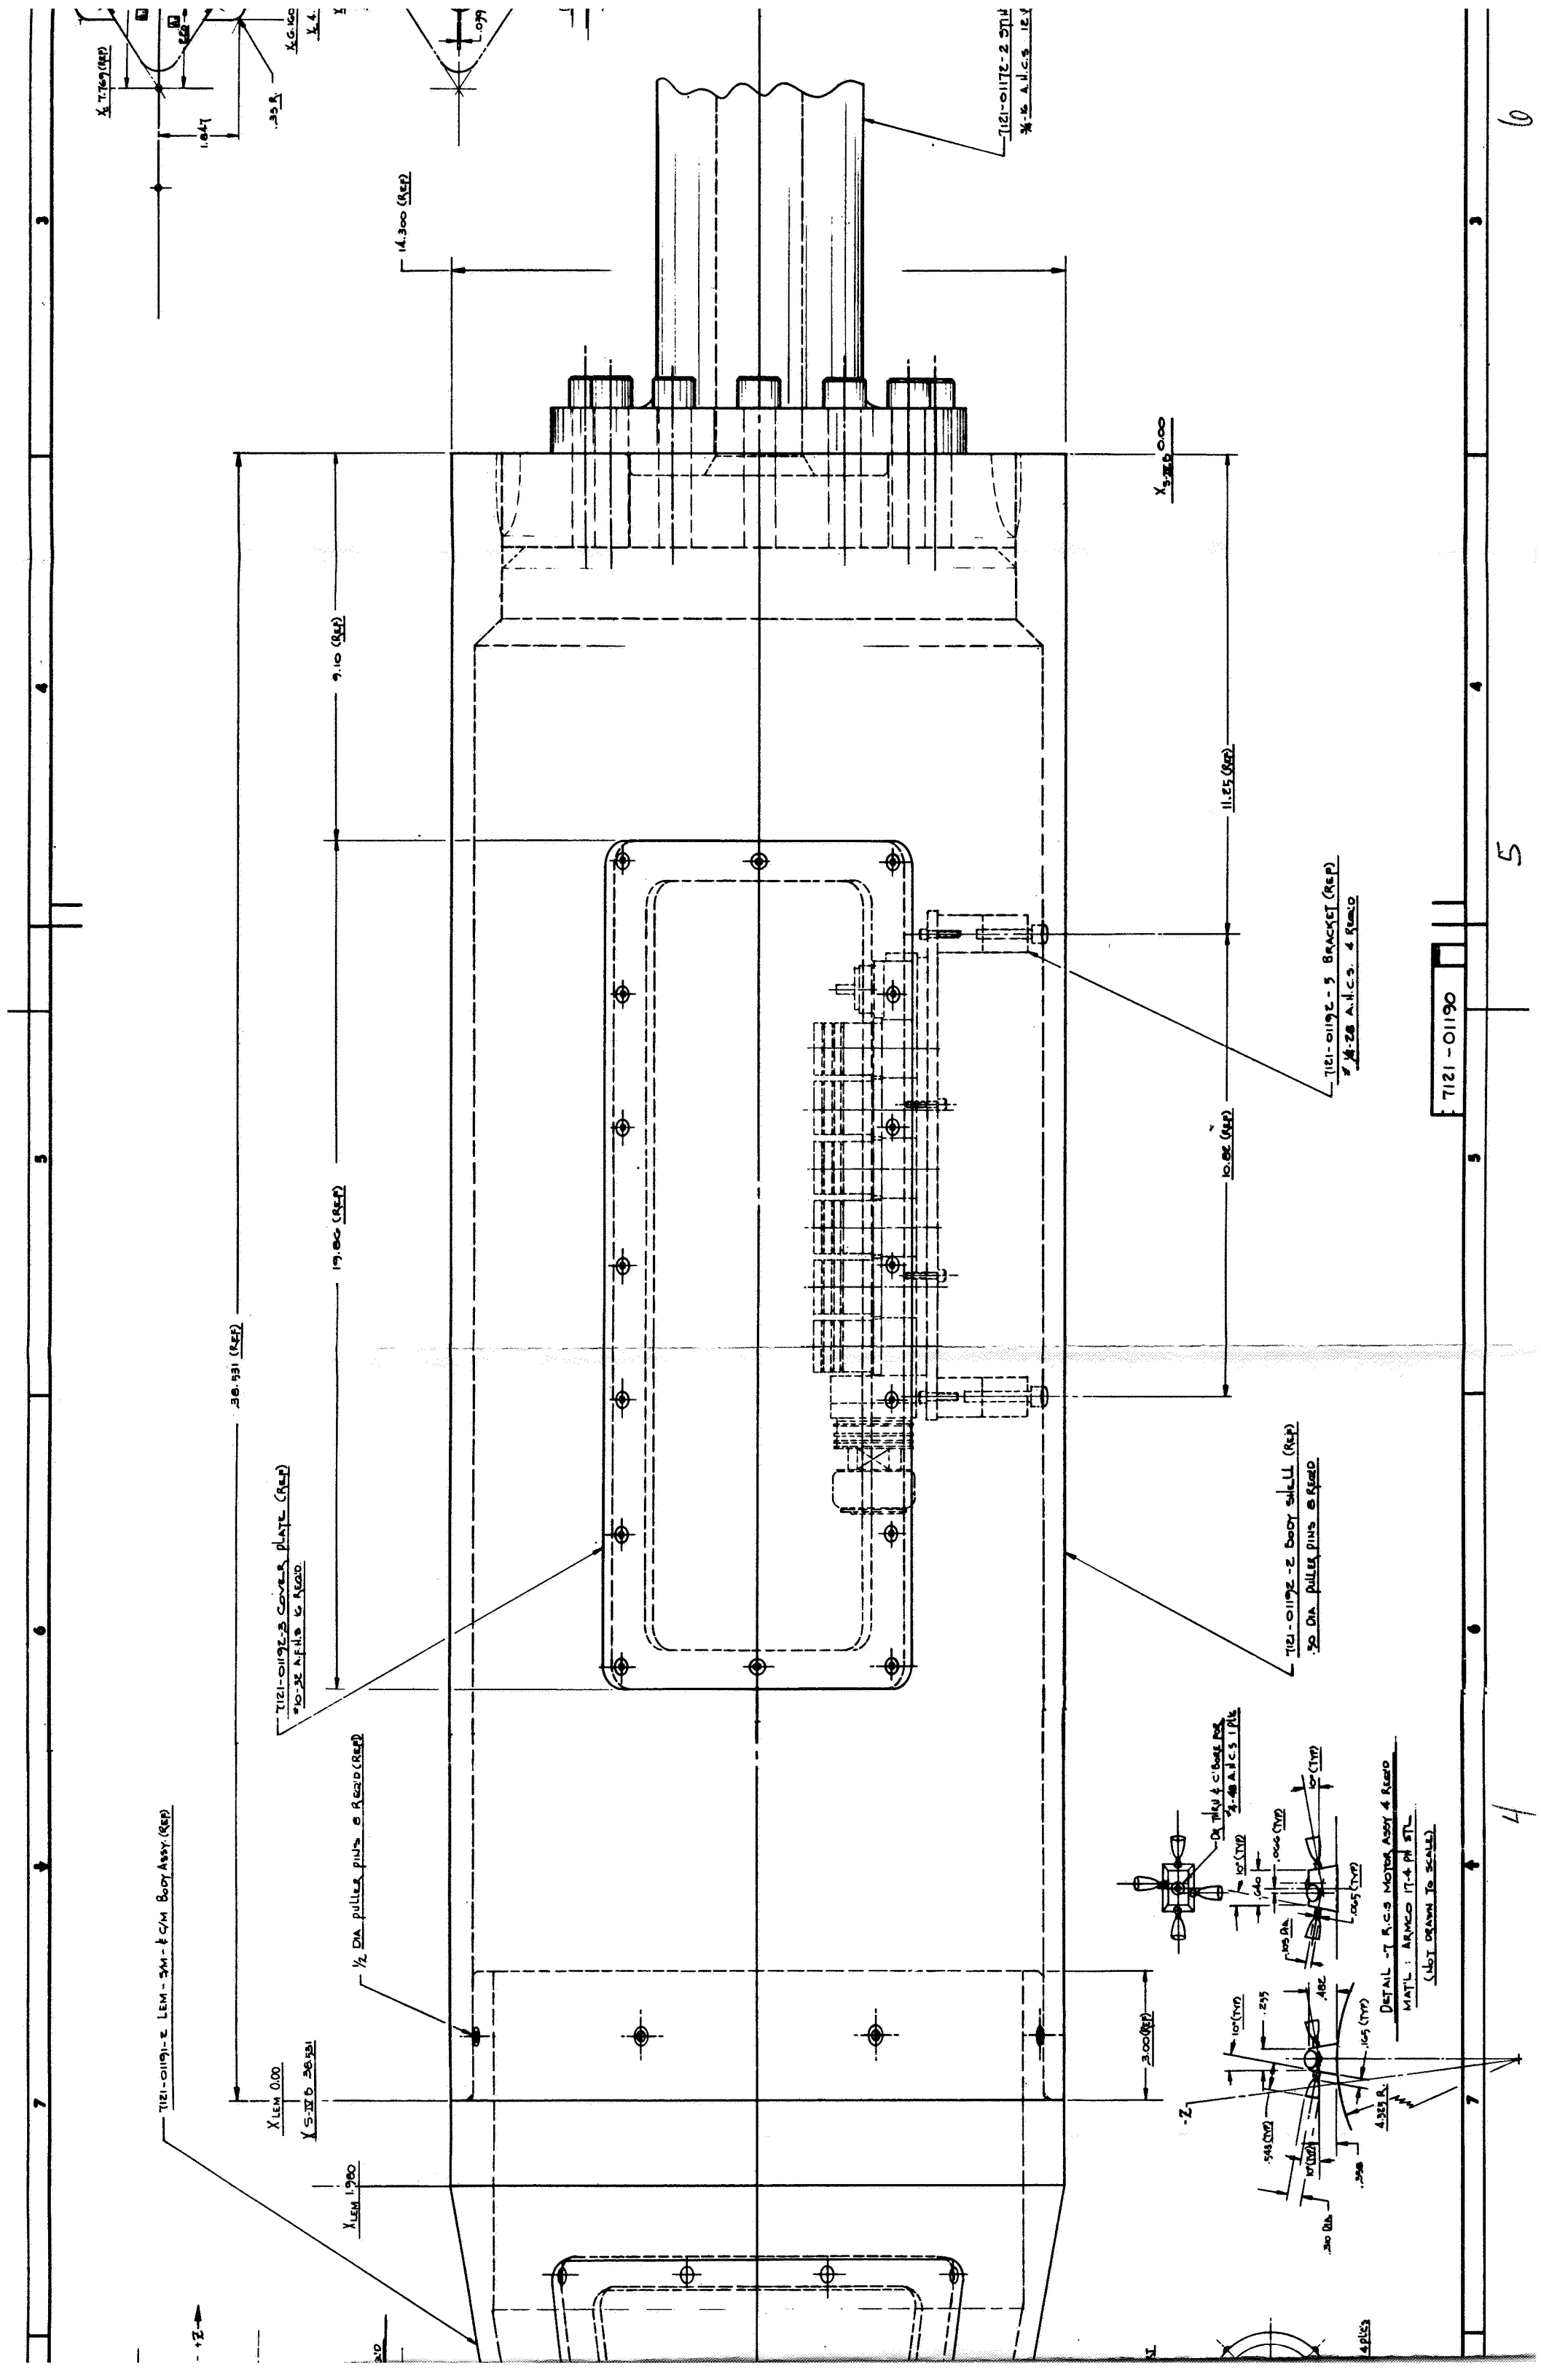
LAUNCH ESCAPE MOTOR NOZZLE 27 REAR
